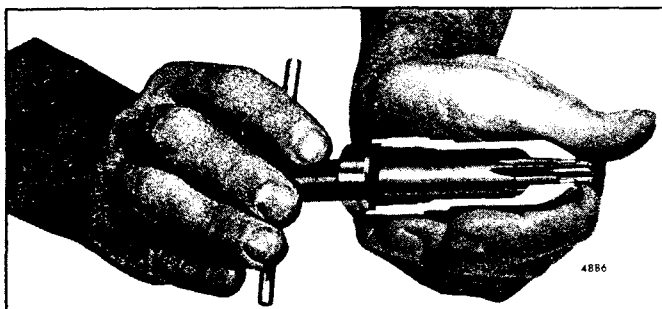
Cleaning Injector Nut Spray Tip Seat Using Tool J 4986-01
